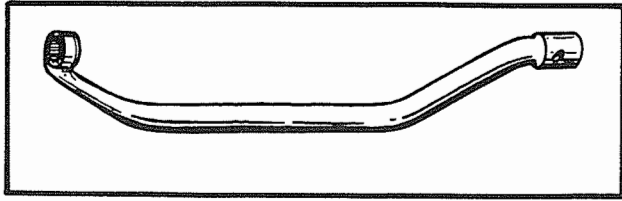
Fuel Injection Pump to Adapter Screw Wrench
